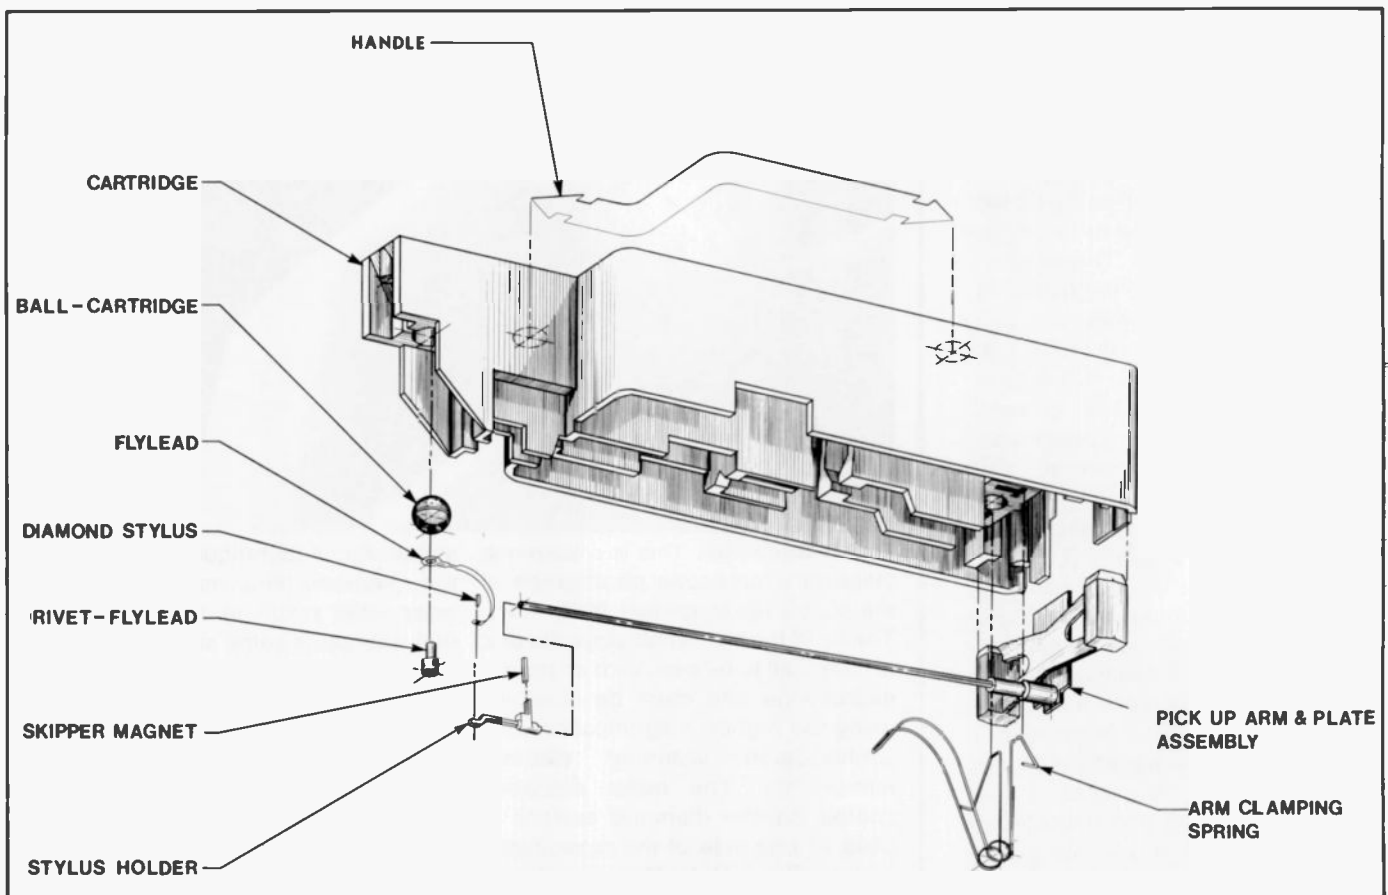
Cartridge Assembly (exploded view). In the cartridge assembly, the case is simply pressed onto the previously assembled ball, pickup arm assembly, and stretched suspension. The arm clamping spring is pushed in to retain the stylus in a protected position. Ball adjustment within its socket provides the final positioning of the stylus tip, as dictated by
